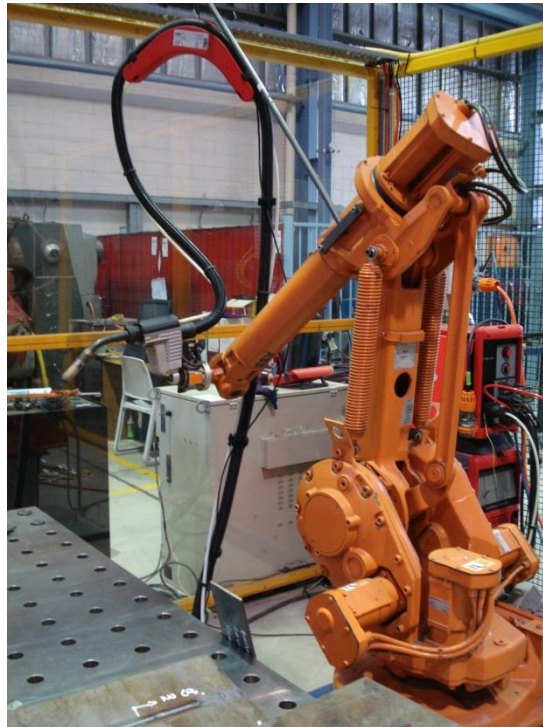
ABB ARB 4400 – 60 – 6 axis industrial robot carrying weld gun used for GMAW trials.
